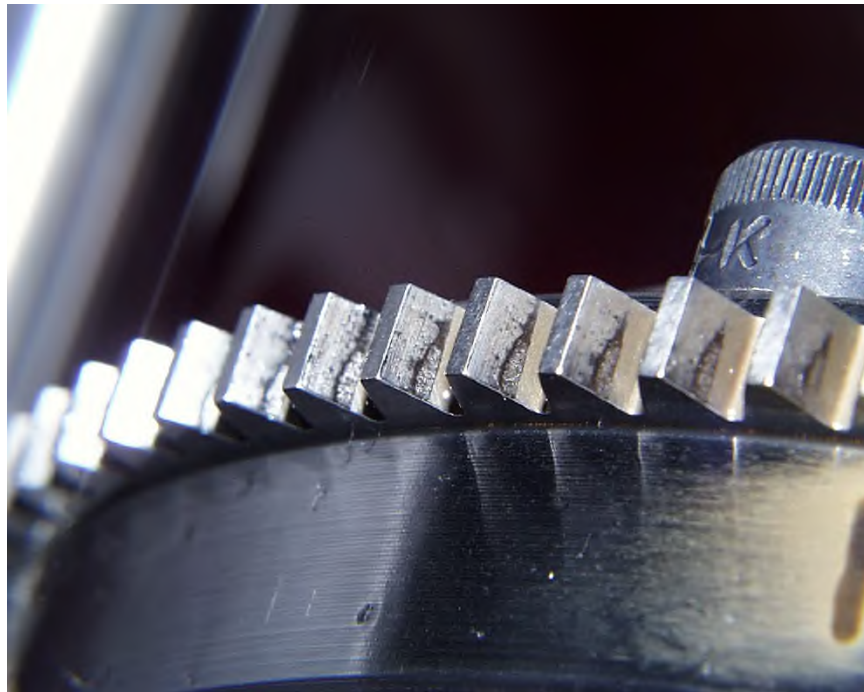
Wear marks on driving side of ring gear teeth after Back-3c.
